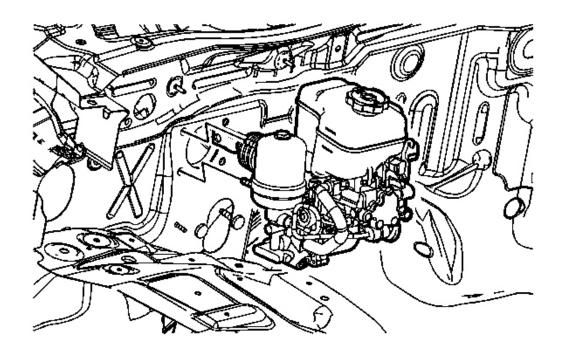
Removing/Installing Master Cylinder/Power Brake Booster Assembly Courtesy of GENERAL MOTORS CORP.
